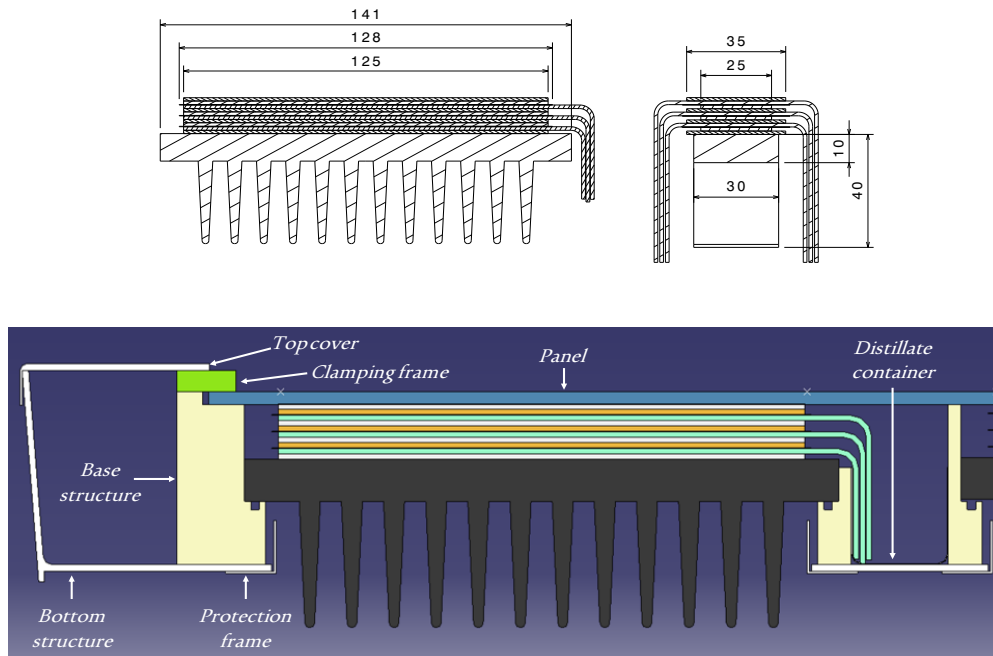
Sections of a single distiller module (top), dimensions are indicated in [mm]; detailed section of the prototype assembly (bottom).
